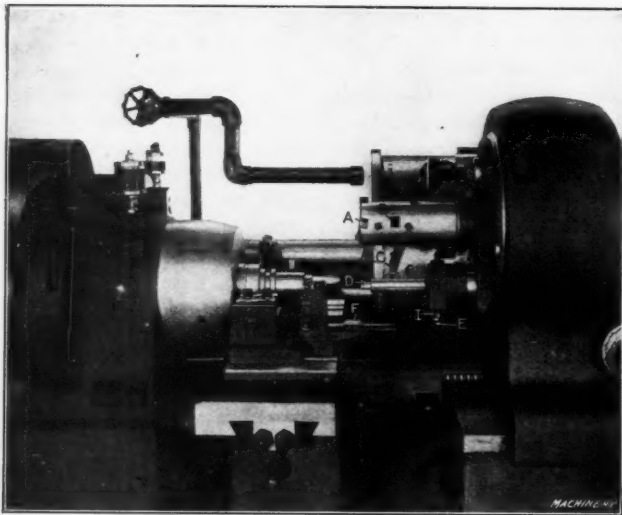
Cleveland Automatic equipped with Turning, Boring and Recessing Attachment
